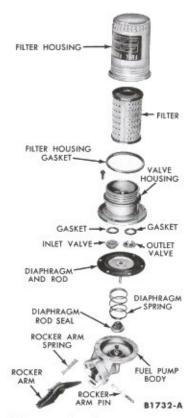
AC Fuel Pump Assembly—Six-Cylinder Engine
